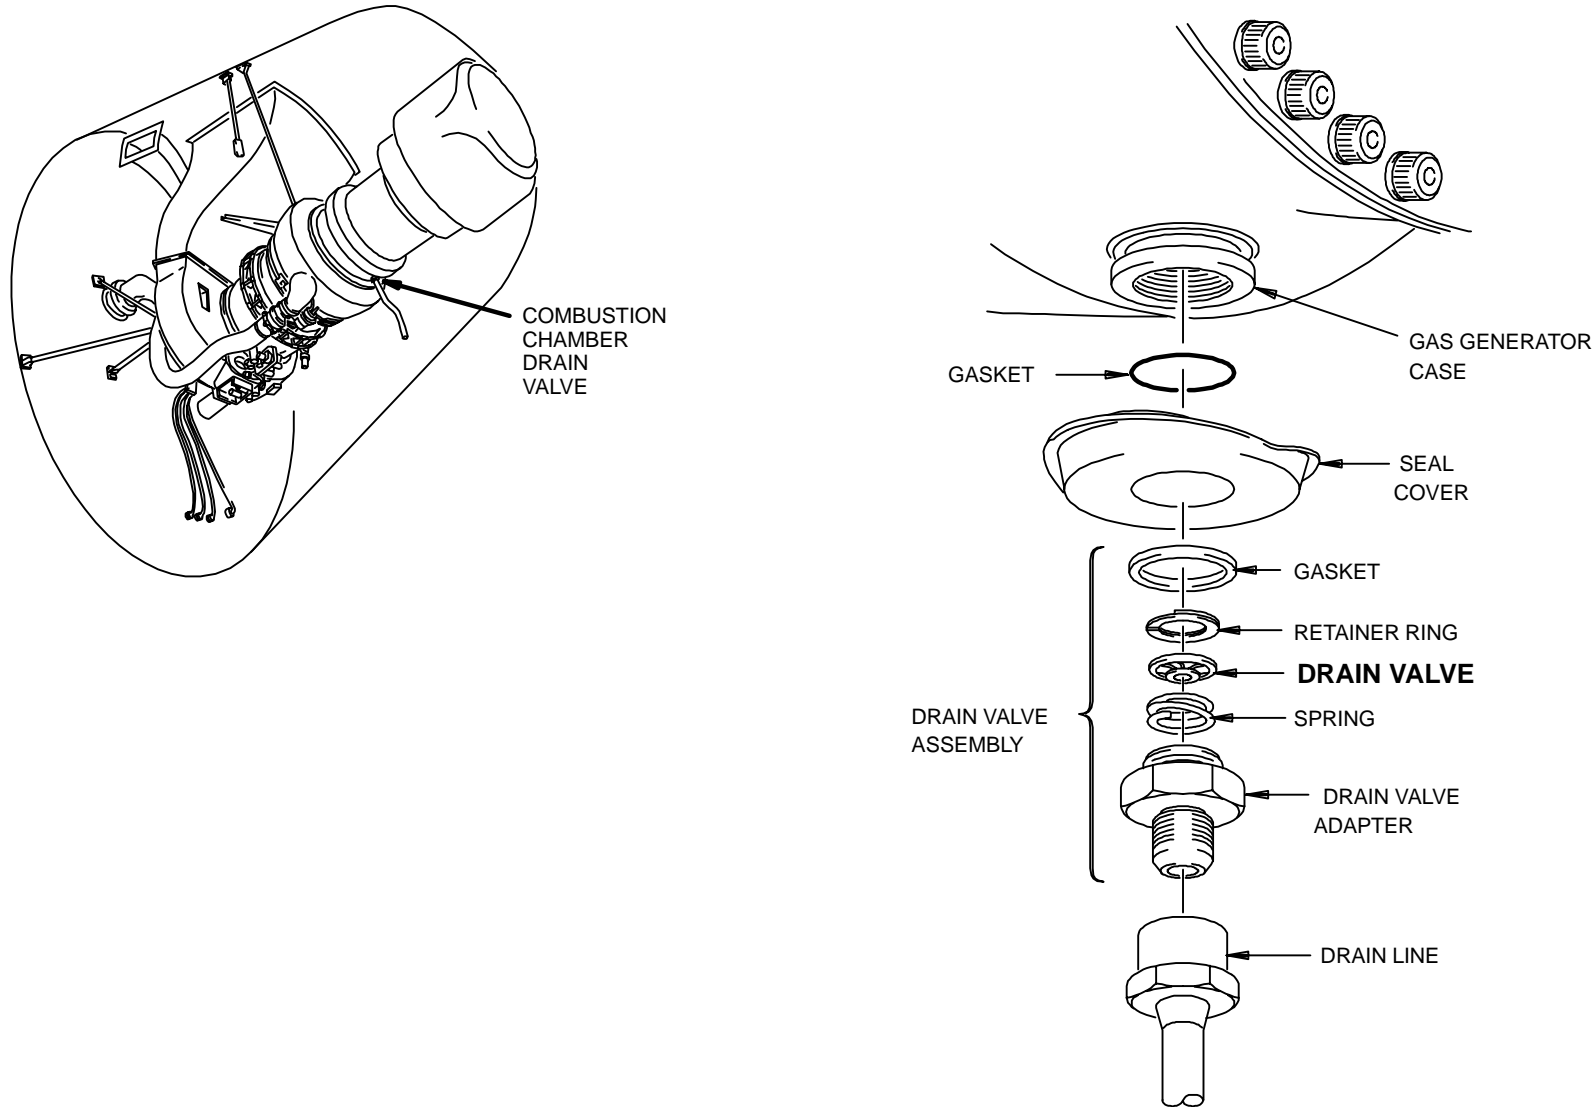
COMBUSTION CHAMBER DRAIN VALVE
